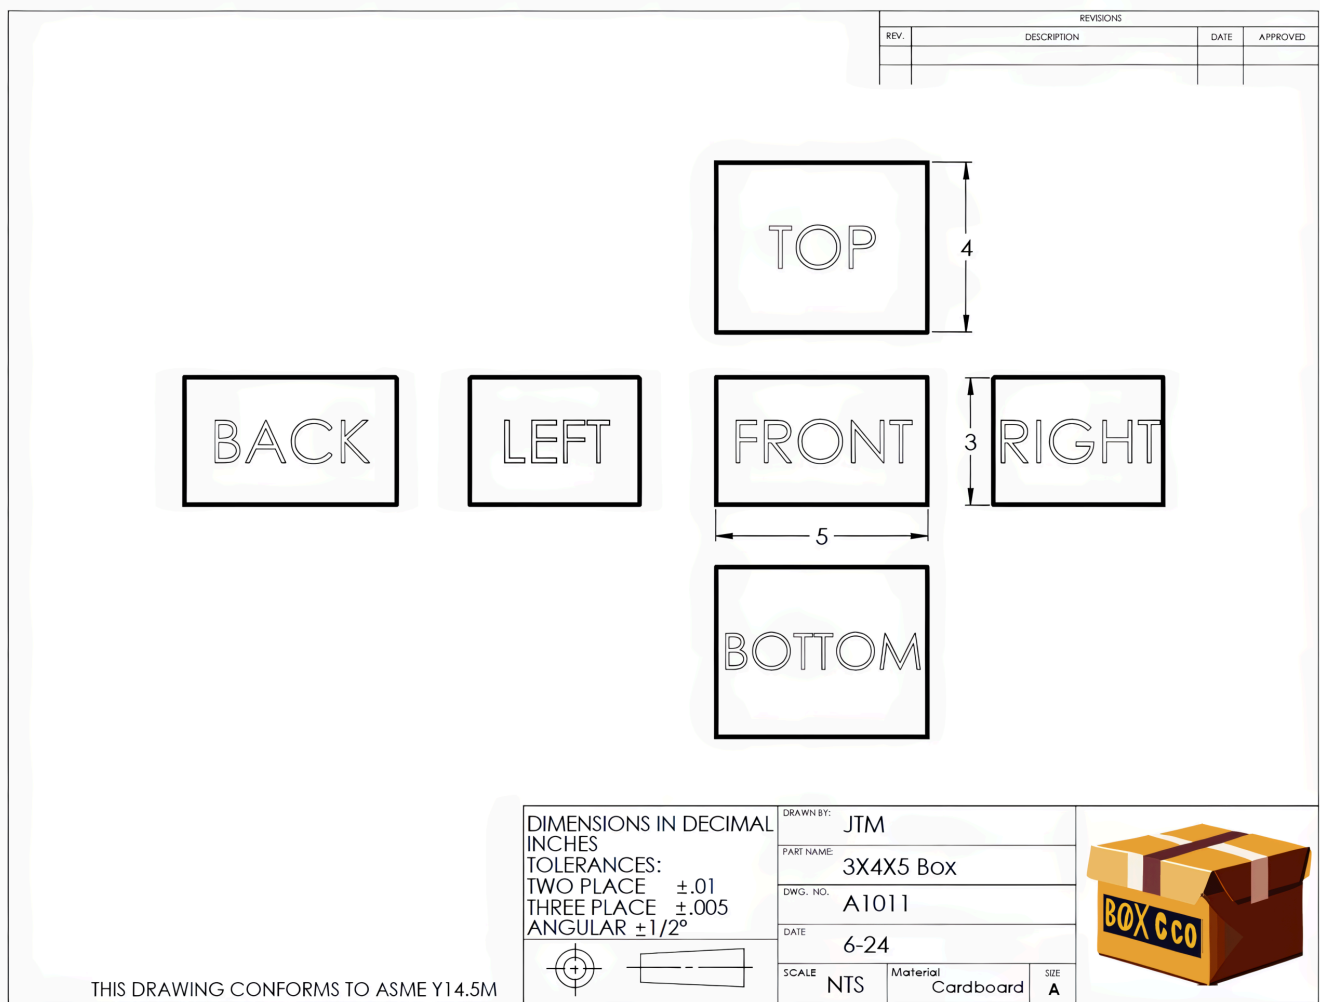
The six principal view placements as they would appear on a part drawing.
